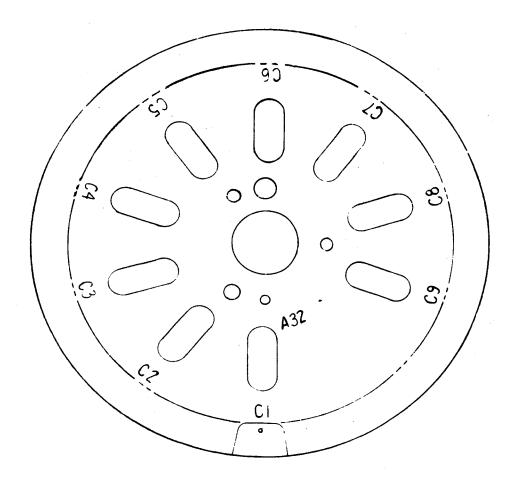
10 kHz Rotor Subassembly A2A4A32, Component Locations
